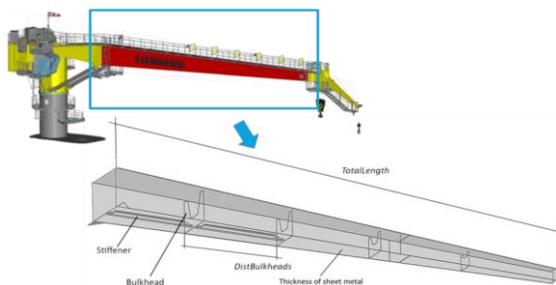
CAD-model of box-type boom crane and sketch of the middle section
